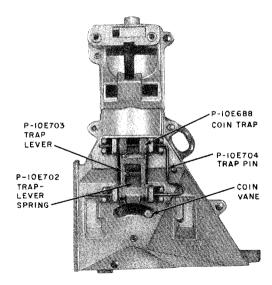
♦Coin Trap and Trap-Lever Assembly♦
